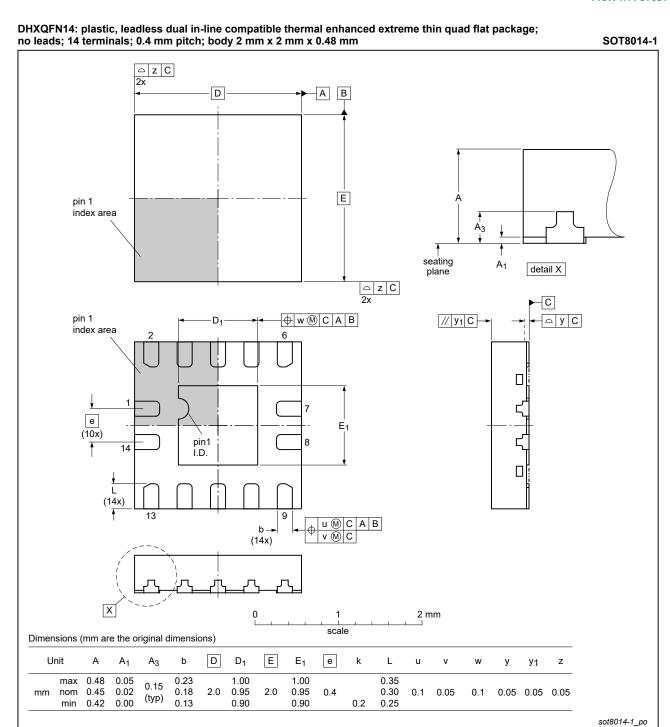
Package outline SOT8014-1 (DHXQFN14)
